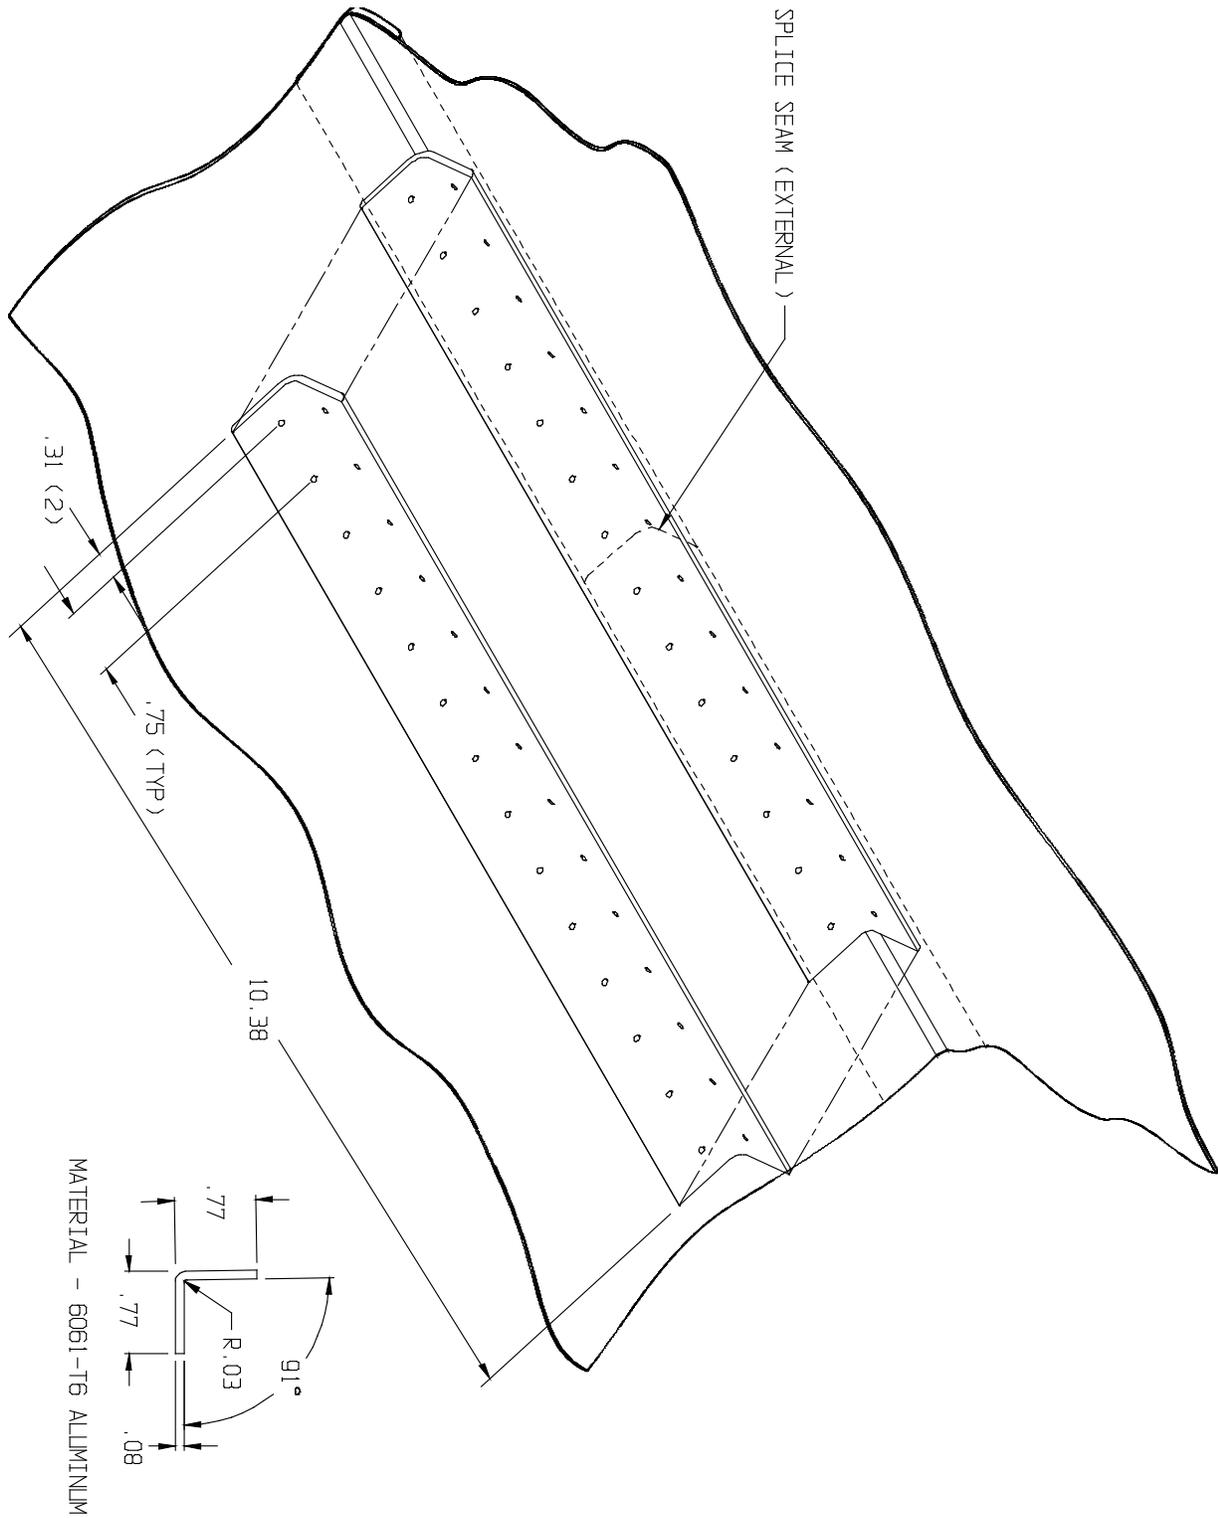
AFT CHINE EXTRUSION REPAIR
